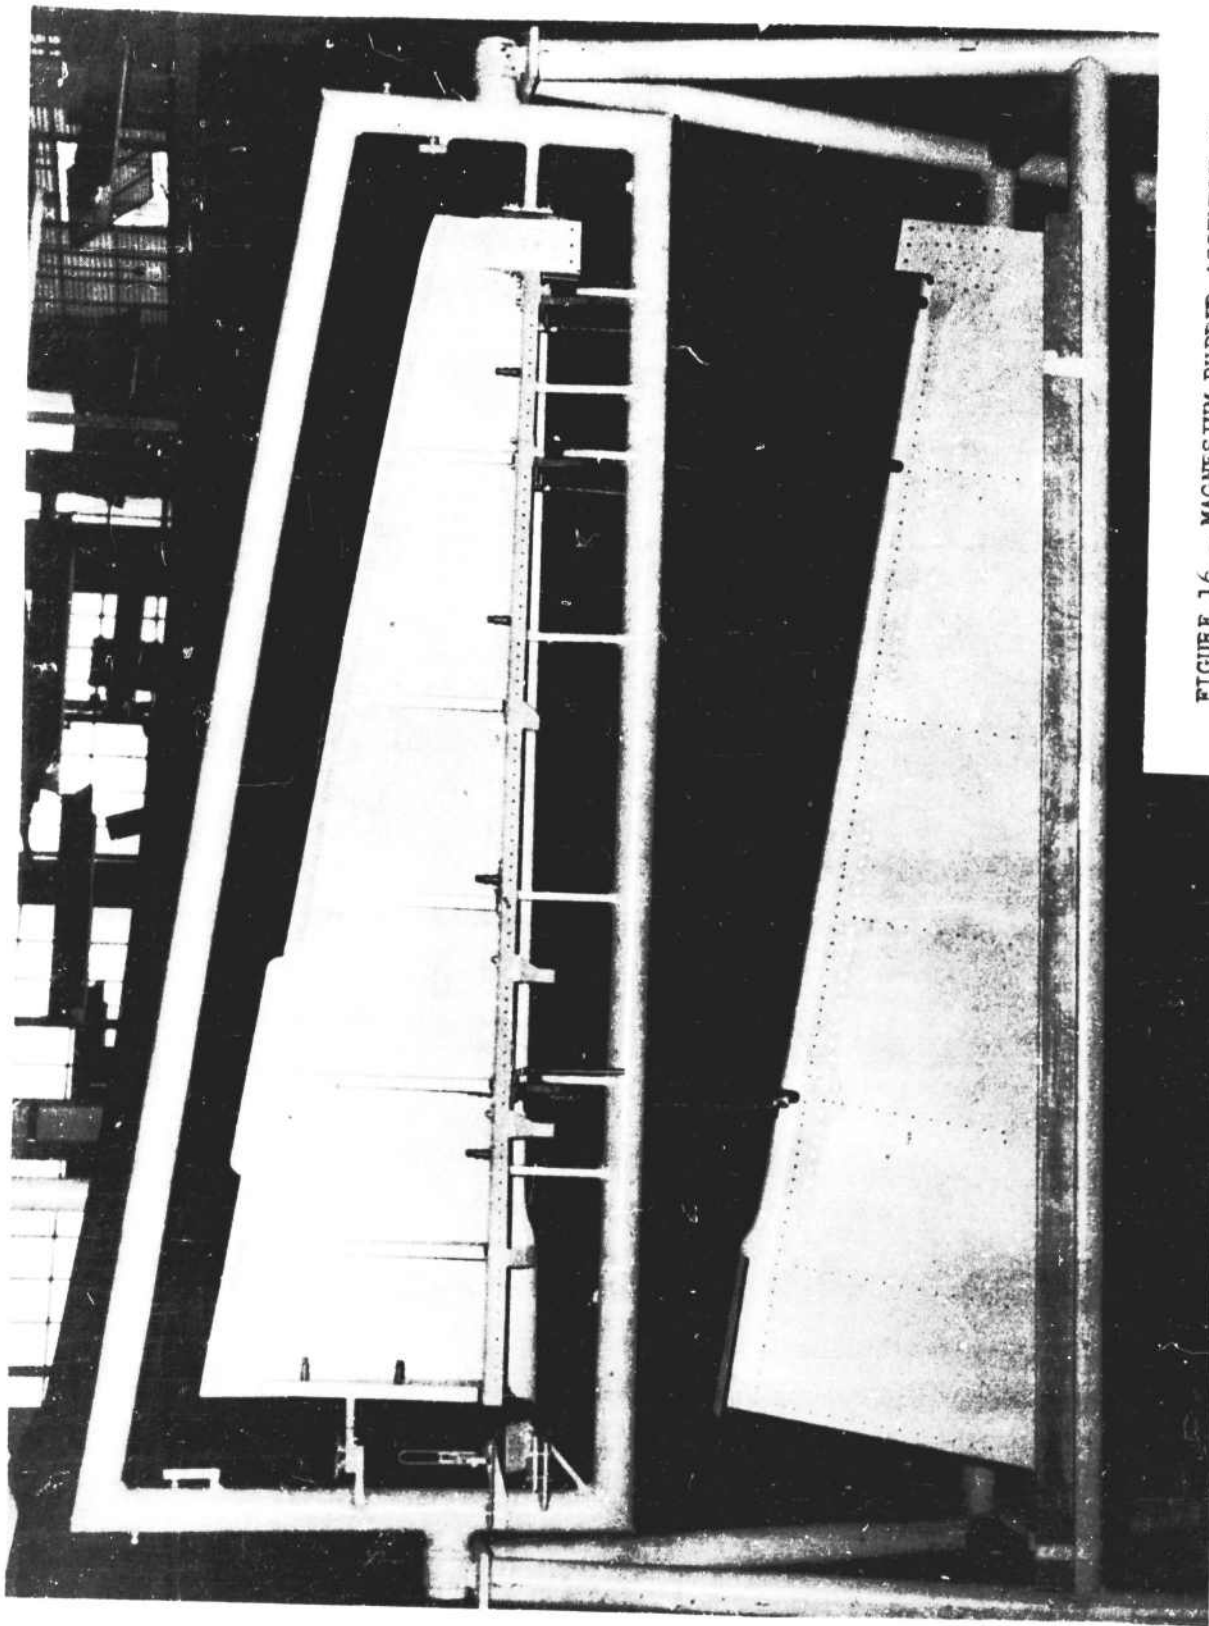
MAGNESIUM RUDDER ASSEMBLY IN
